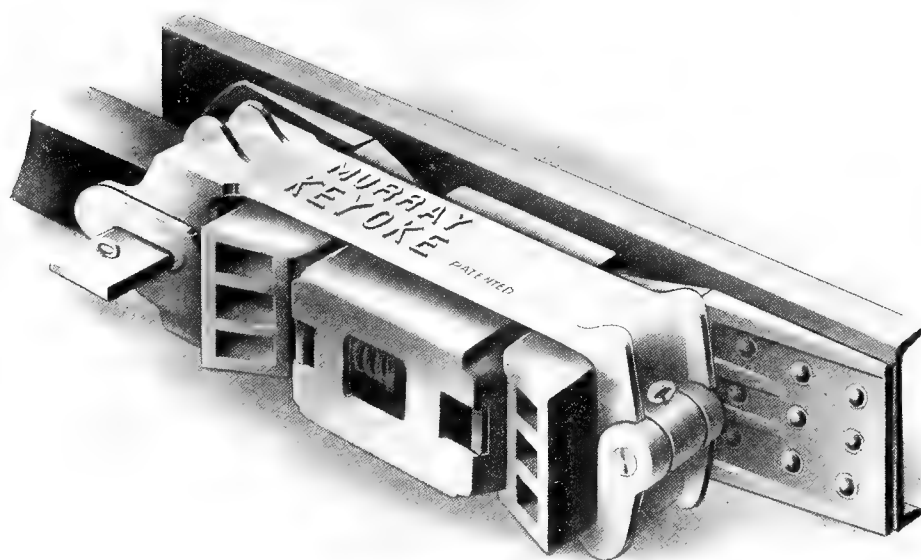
Murray All Cast Steel Friction Draft Gear and Murray Cast Steel Keyoke Applied to Steel Center Sills. Keyoke Railway Equipment Company.
